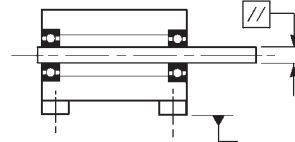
Parallelism of shaft axis to mounting datum
